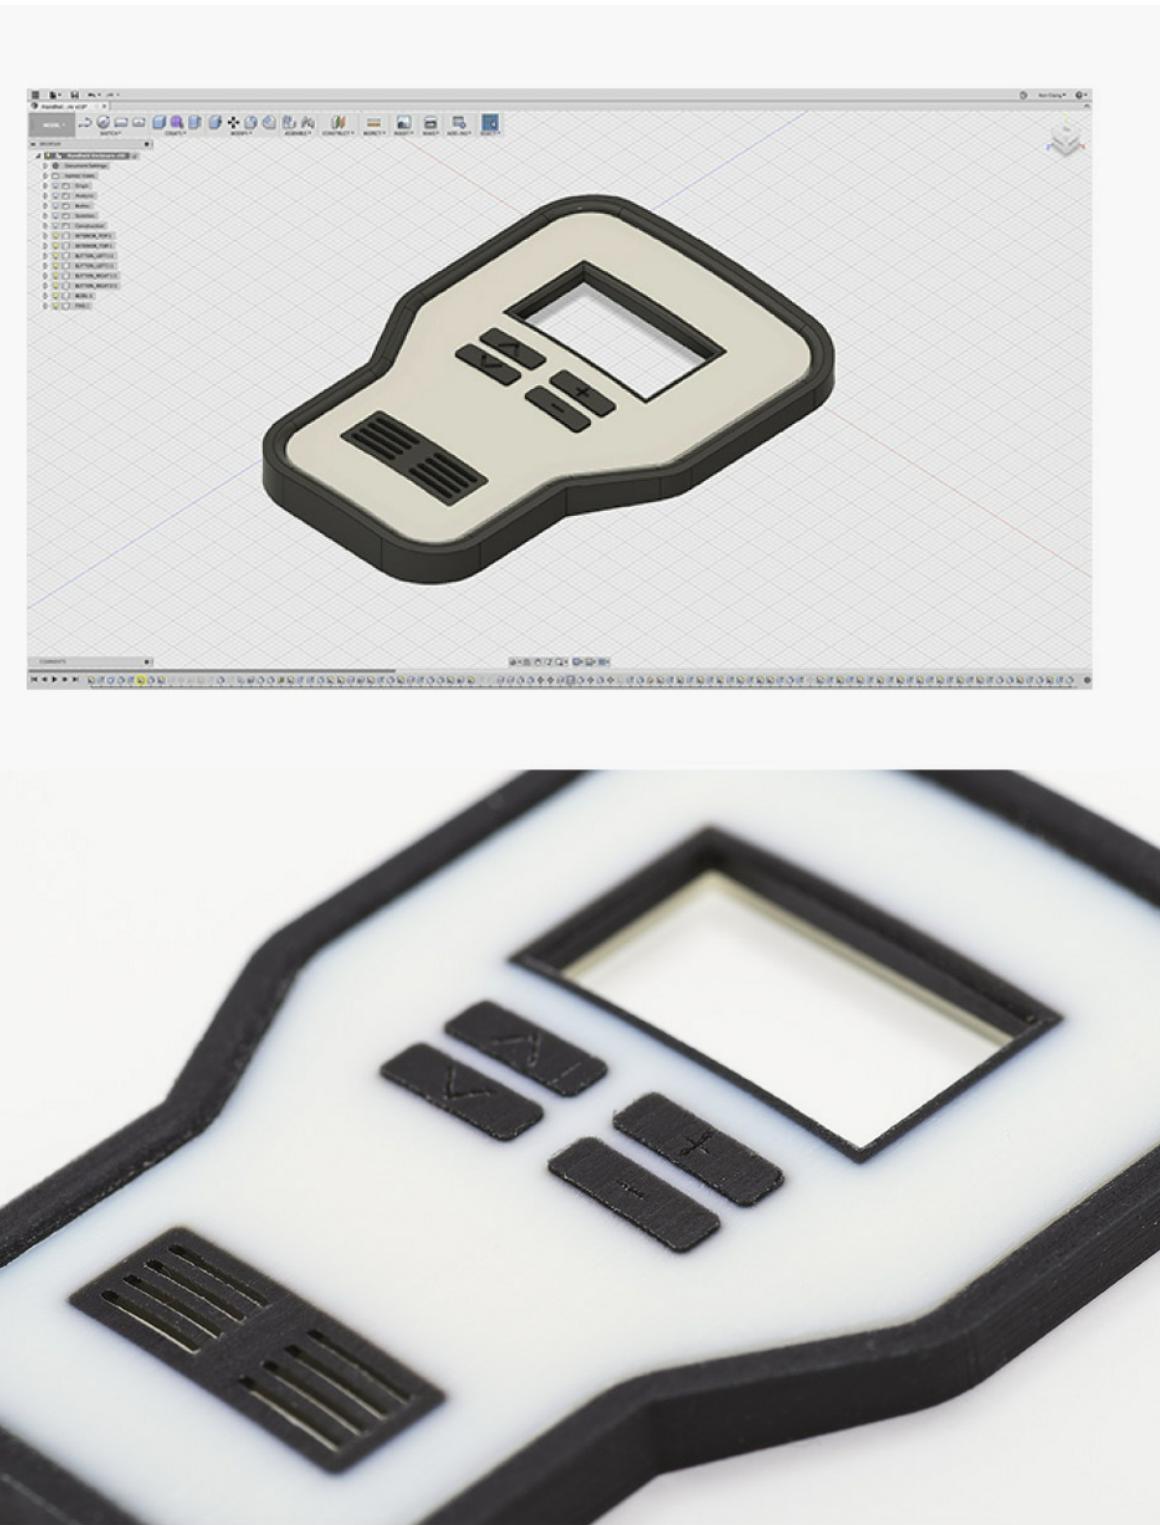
A CAD model, created in Autodesk Fusion 360, of a handheld device where the sections of the design that will be printed in two different materials have been modeled as separate parts (top). The final multi-material prototype with rigid opaque (white) sections and flexible rubber (black) with a Shore Hardness of 70 (bottom)
